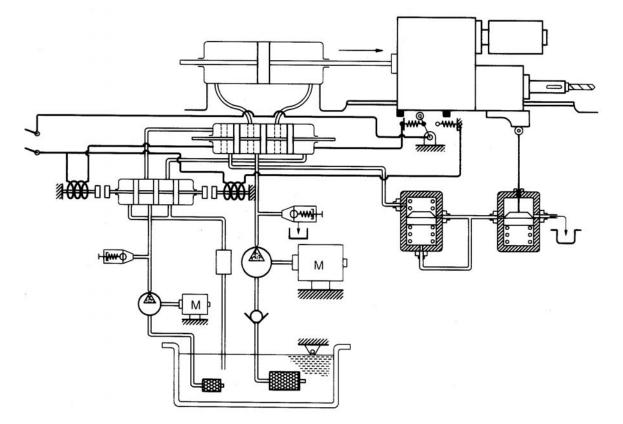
Circuitry and kinematic system of hydraulically driven machine tool
